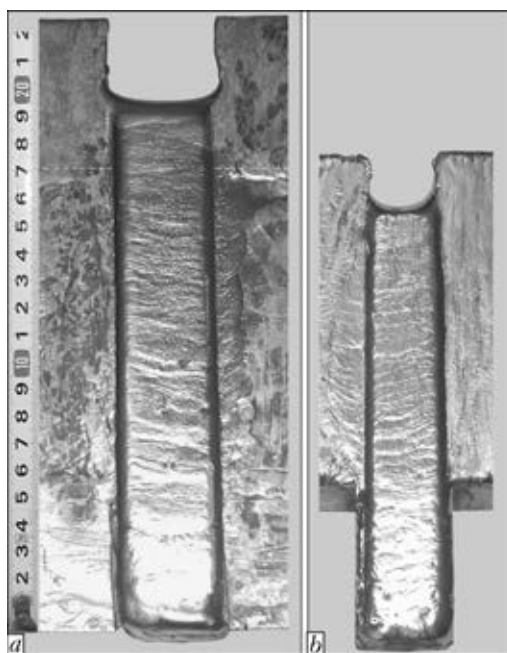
Side surfaces of welded joints produced using standard (*a*) and narrow-gap ESW (*b*)
